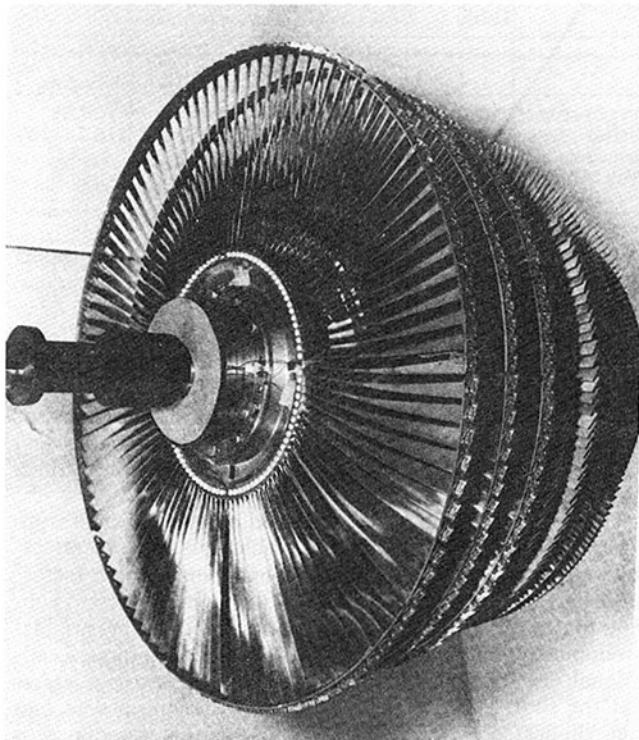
Curtiss-Wright TJ60 compressor rotor assembly
